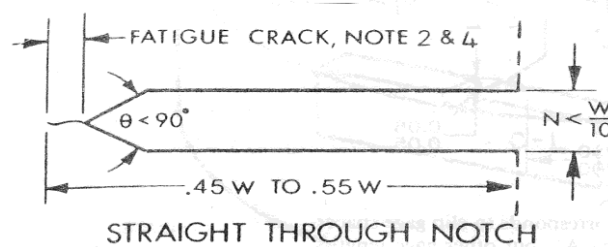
Crack Starter Notch and Fatigue Crack for Straight through Notch [7]
